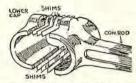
Connecting-rod bearing end with cap removed to show shims.
